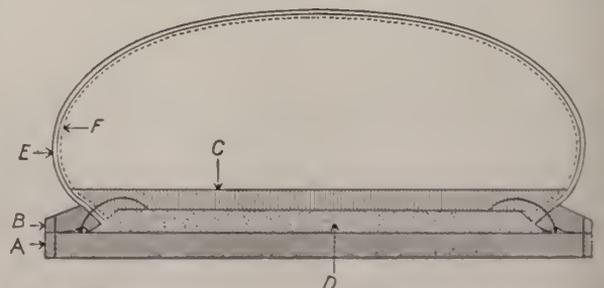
A, sole; B, welt; C, insole; D, fill (too thick); E, vamp; F, drill lining.
